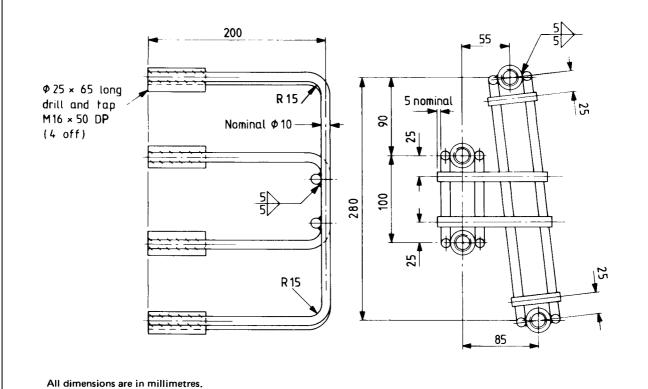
Connector for precast transition unit: type 2 (for transition to tensioned rectangular hollow section beam safety fence)
